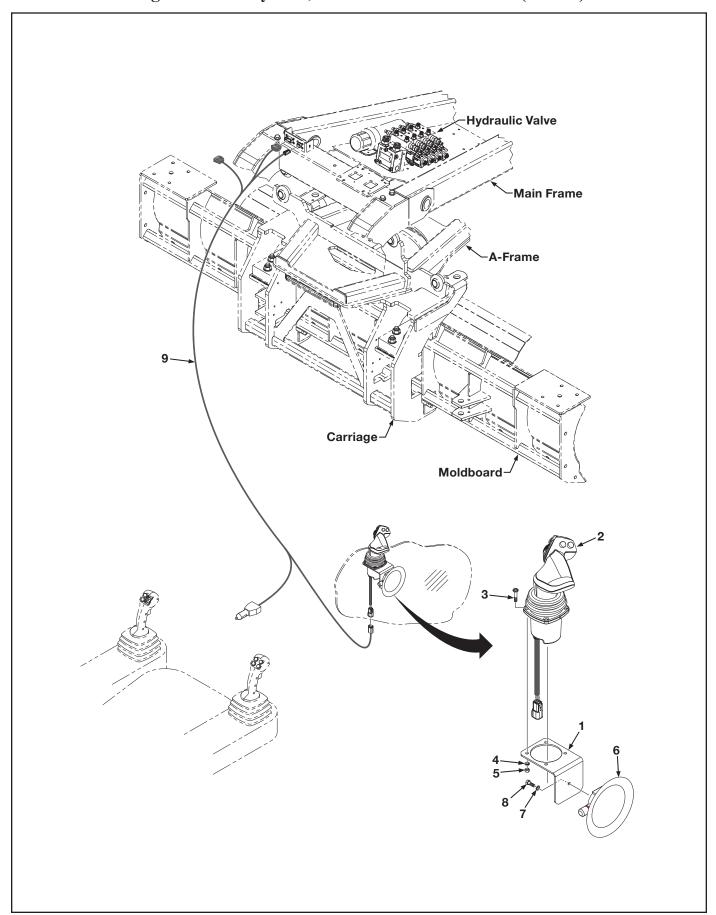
Joystick, Harness & Related Parts (Rental)
